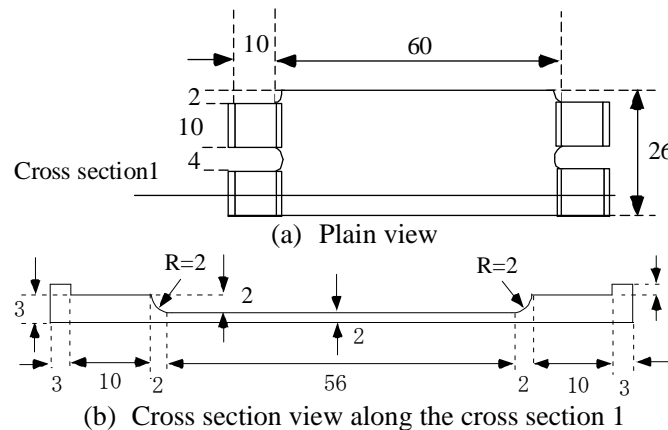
Shape and dimensions of a specimen for a uniaxial tension test
